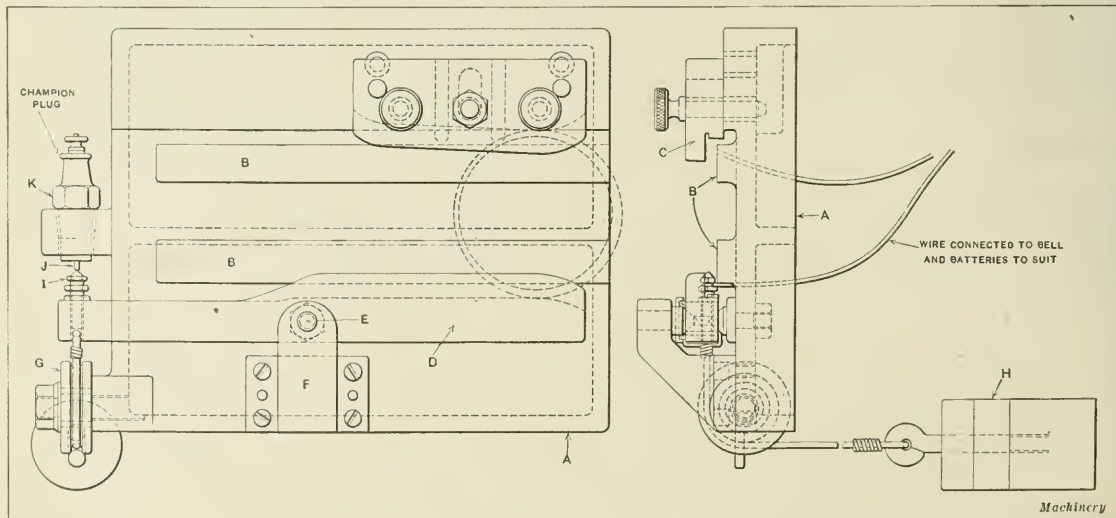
Piston Ring Testing Device depending for its Reading on the Sense of Hearing
